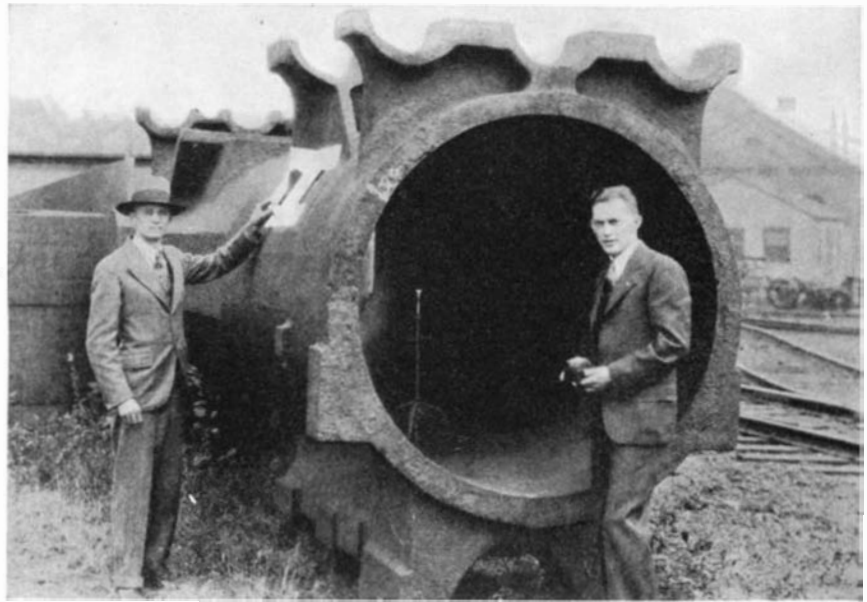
Arrangement for radiographing a large cylindrical casting. The radium is held on a stand inside and the films fastened outside around the circumference of the casting in two parallel belts. See text in the column below
